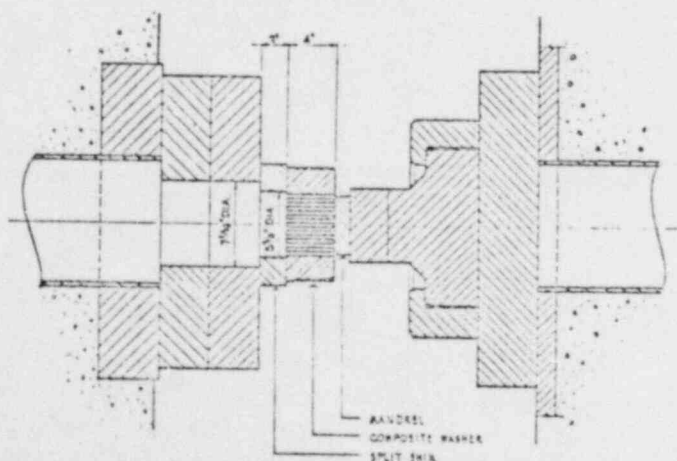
Fixture for Series B1 tests. Components being tested are shown shaded. Mandrel conforms to shape illustrated in Fig. 3.3-11 for Path 1 shear failure mode.
